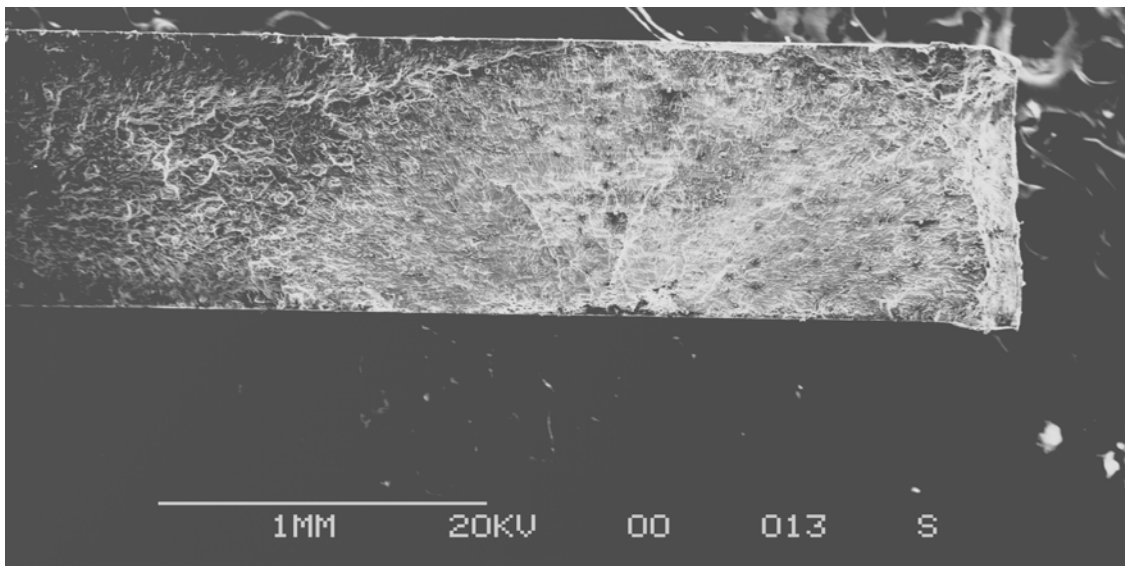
Fatigue Crack on Fracture Surface of Specimen 5926.
